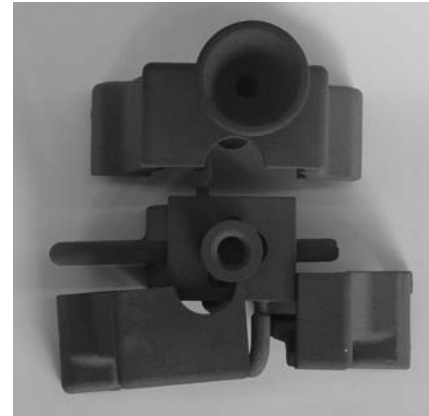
SLS core, and shell prototypes ready to assemble the cast mould
